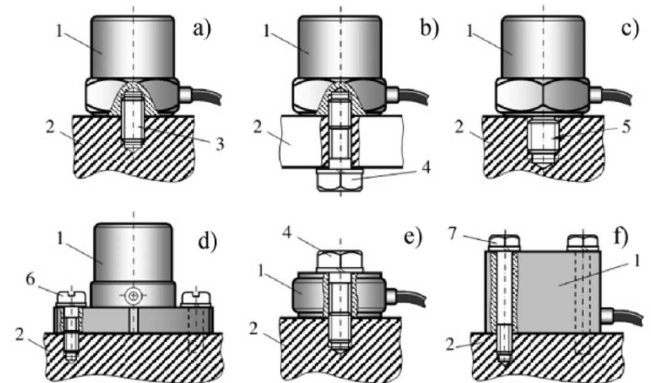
Versions of accelerometers threaded fastening: 1 — PA, 2 — test object, 3 — thread stud, 4, 6, 7 — screw, 5 — threaded ledge.
